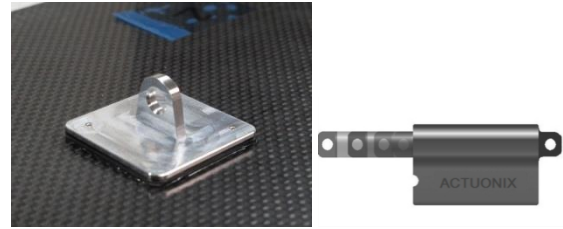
(left) locking lug on the CFRP base of a panel cover, (right) locking actuator
